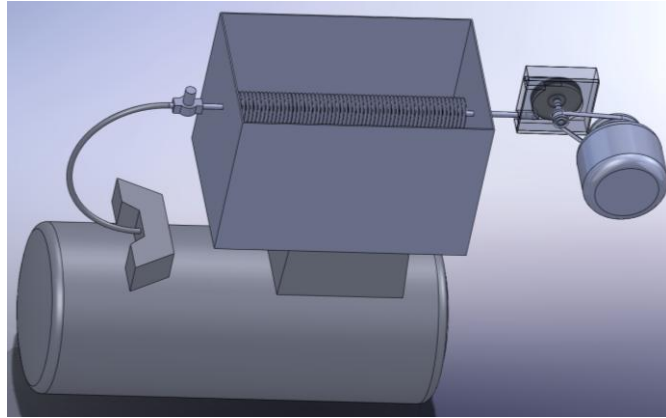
CAD design of prototype CAES system will be built by University of Colorado-Boulder senior engineers this spring
